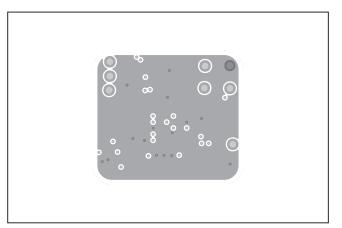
MAX30102 Daughter Board PCB Layout—Layer 3
